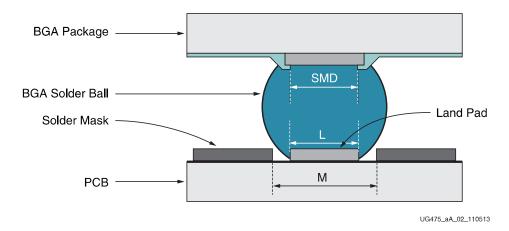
Example of an NSMD PCB Pad Solder Joint
